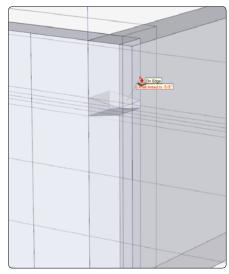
Hide the carcase top and draw one drawer side in place.
